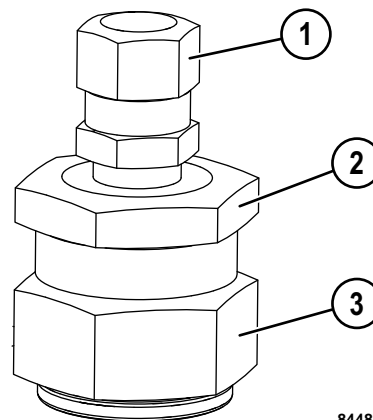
PISTON ACCUMULATOR CHARGING VALVE
